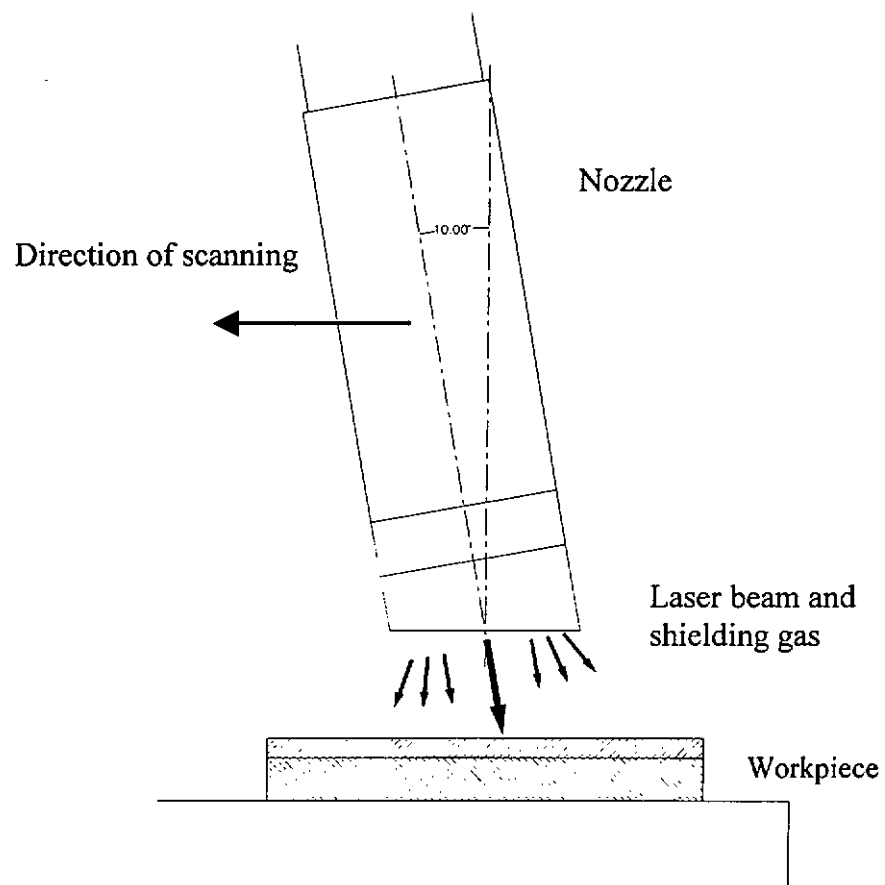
6 Schematic showing the tilt angle of focusing head, position of gas shielding feed pipe and surface treatment of specimens.
